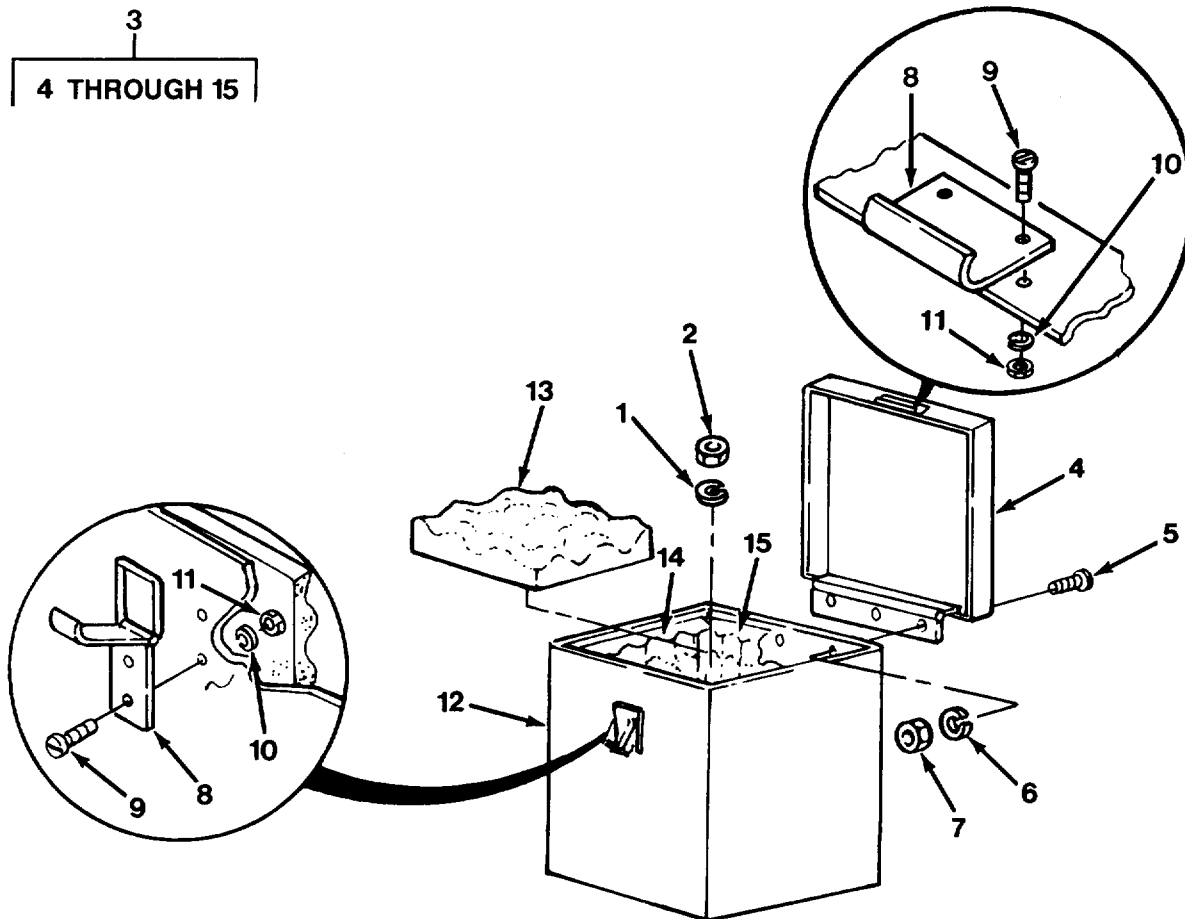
BITUMETER STORAGE BOX ASSEMBLY
